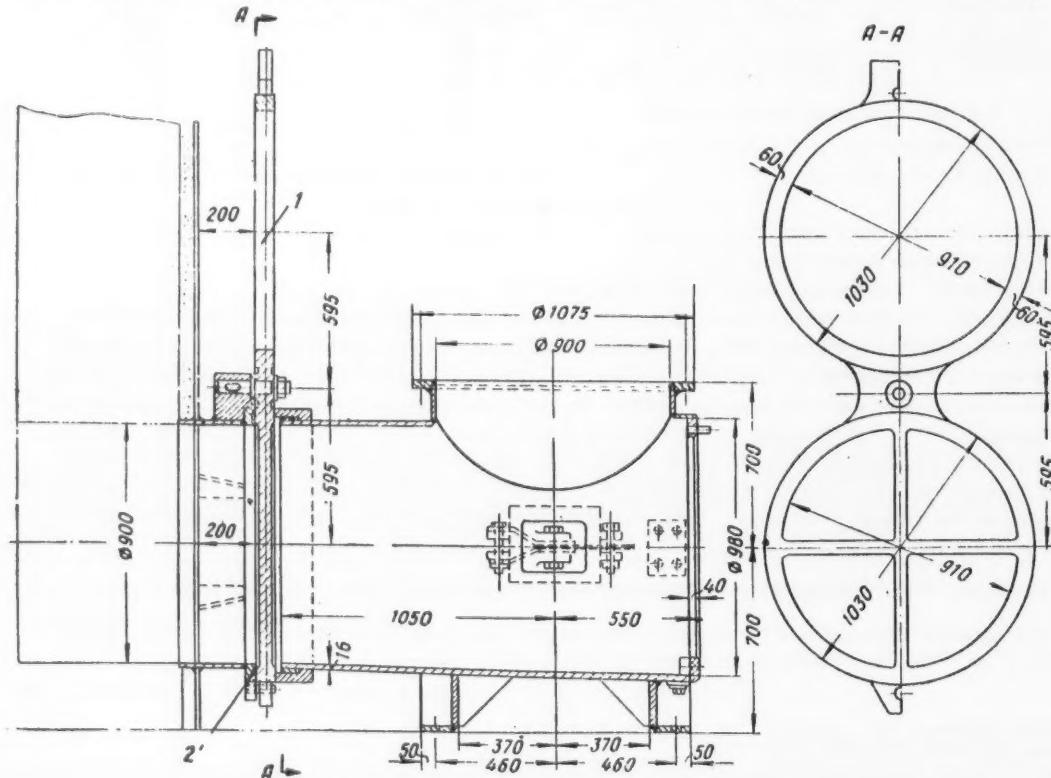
Gas burner of the old design: 1 - slide gate; 2 - stuffing box.
